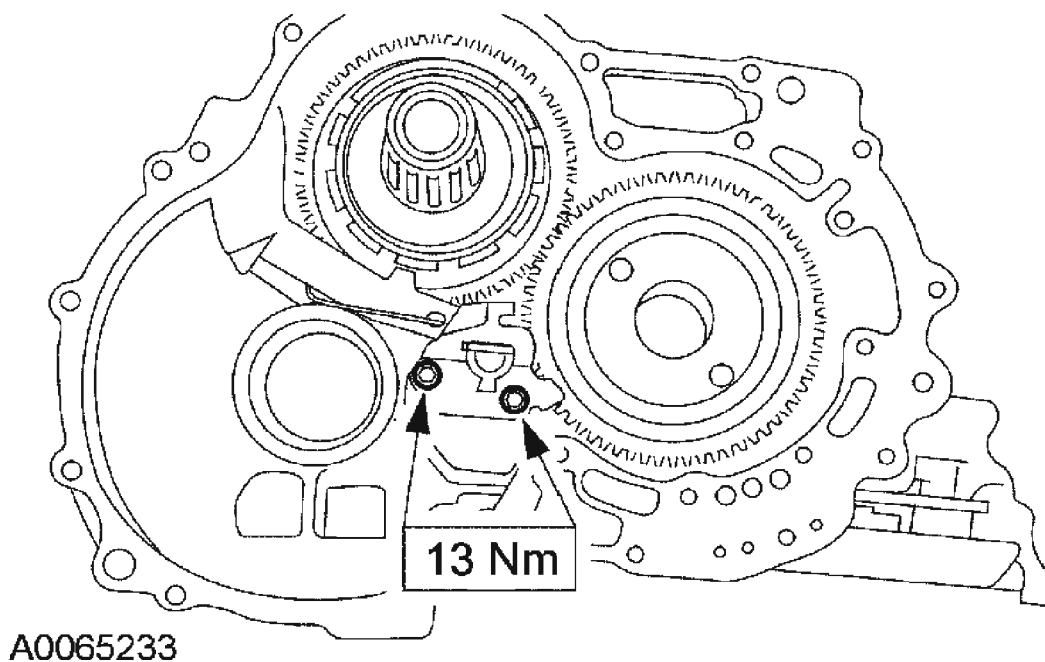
Installing Parking Pawl Assembly Cover And Bolts
